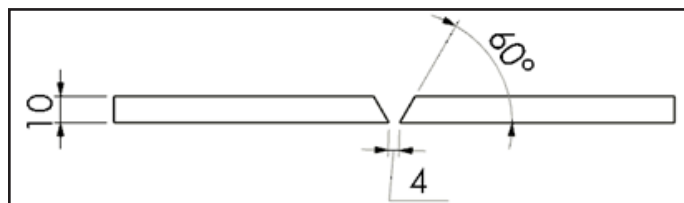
Geometry and dimensions of the test joint weld groove
